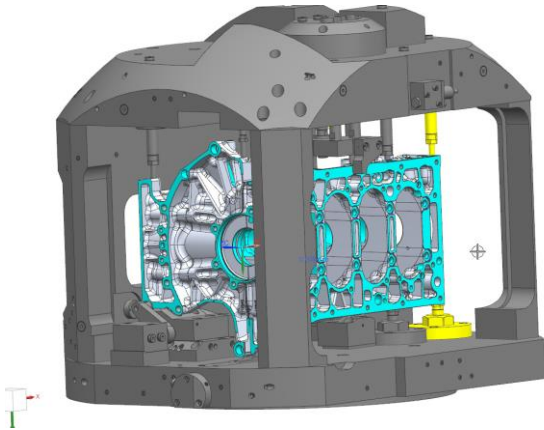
machining the block and bedplate conjoined requires an almost cage like fixture. With courtesy of Jörgen Fock.
